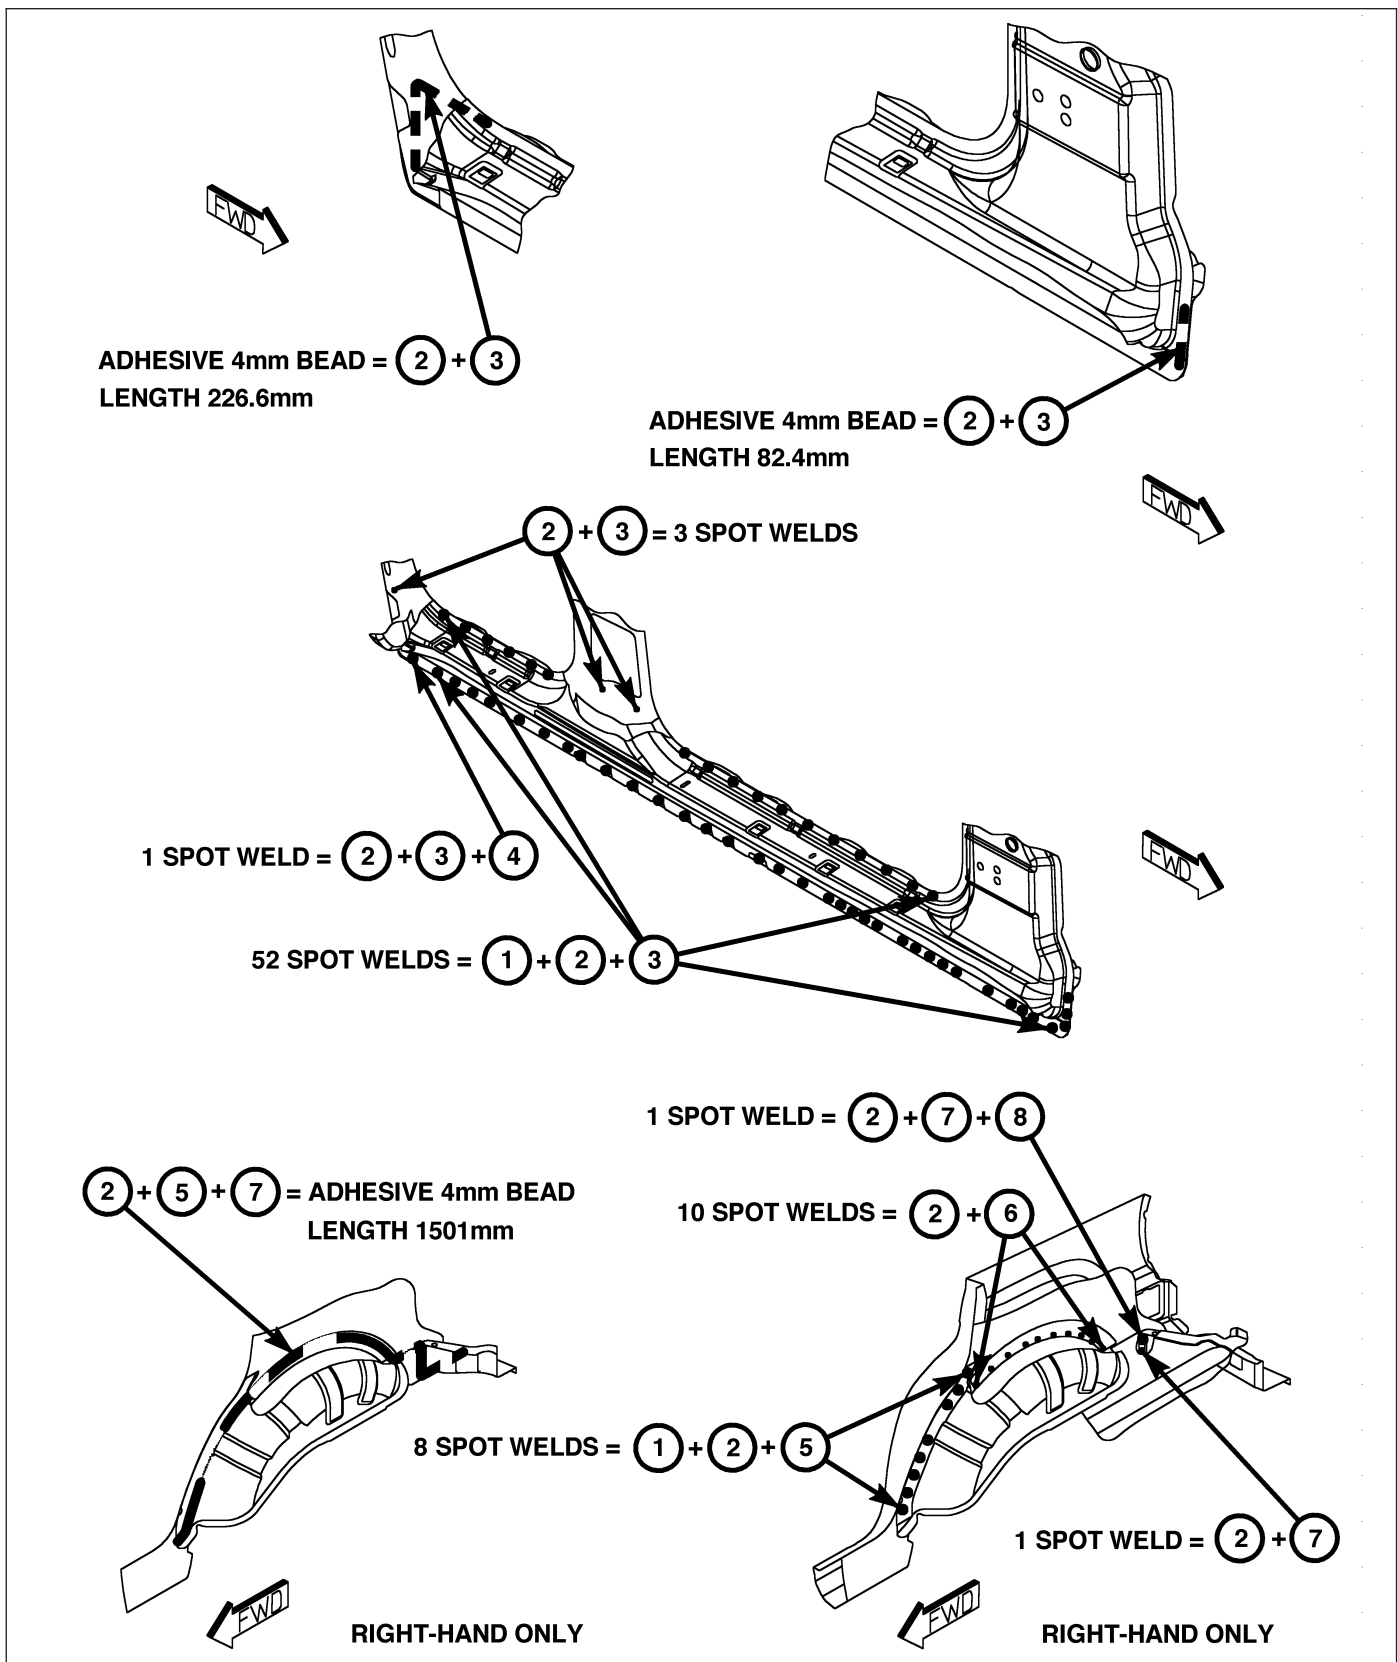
BODY SIDE SILLS AND REAR WHEELHOUSES
